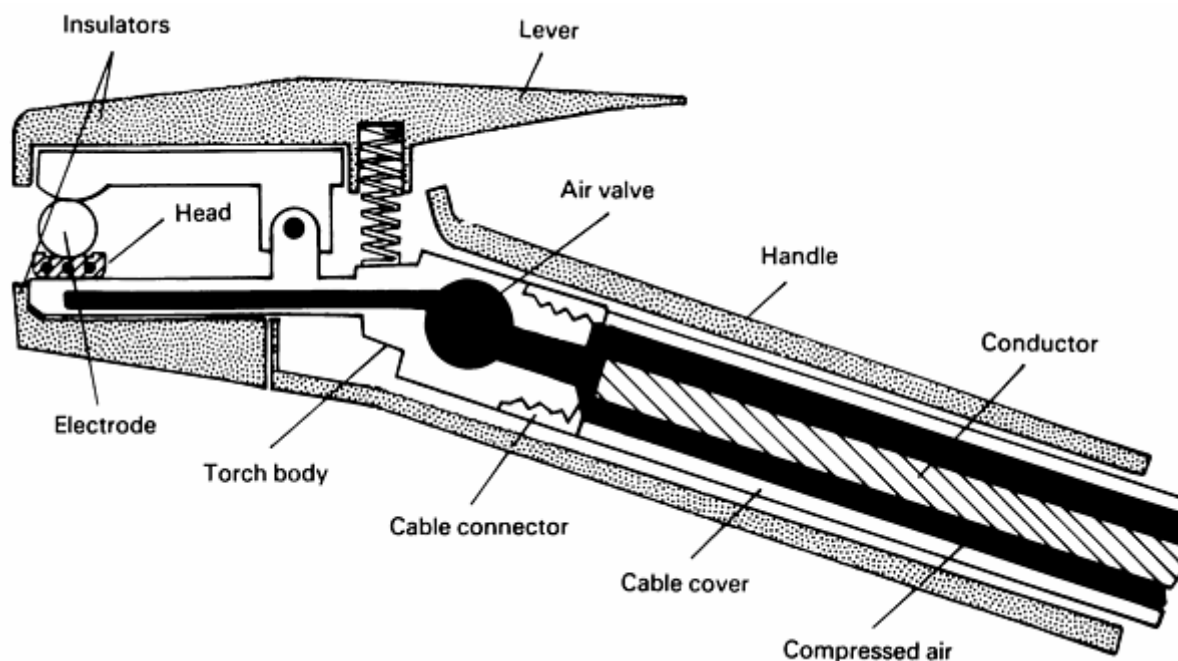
CUTAWAY VIEW OF A MANUAL GOUGING TORCH WITH AIR FLOW ON BOTTOM OF ELECTRODE
